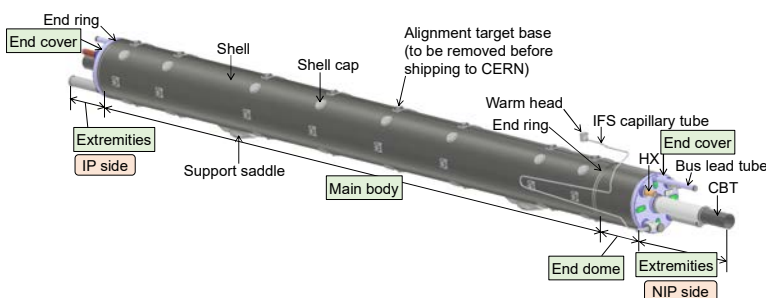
3D CAD model of the completed MBXF cold mass.
